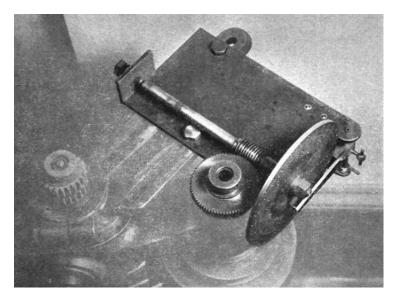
Dividing Plate Device Which Could Be Adapted to the Watchmaker's Lathe
